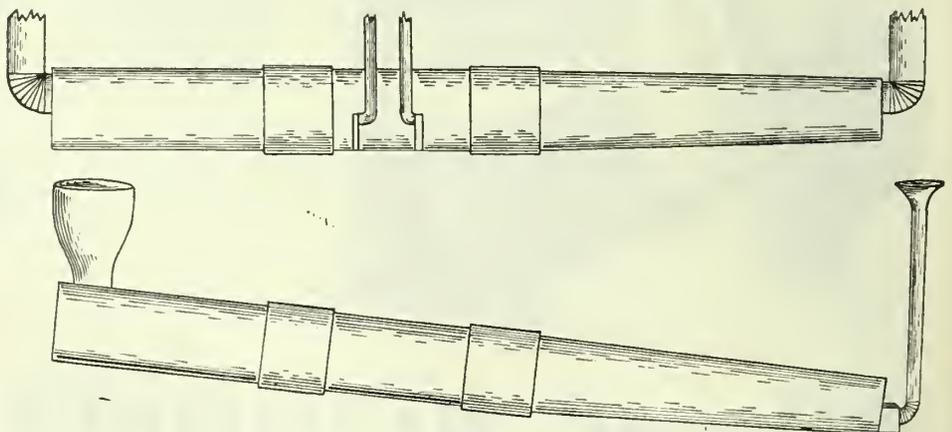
Same casting gated on the side and with riser on each end. Fig. 3.—Casting poured on incline. Riser could be at end similar to Fig. 2.
